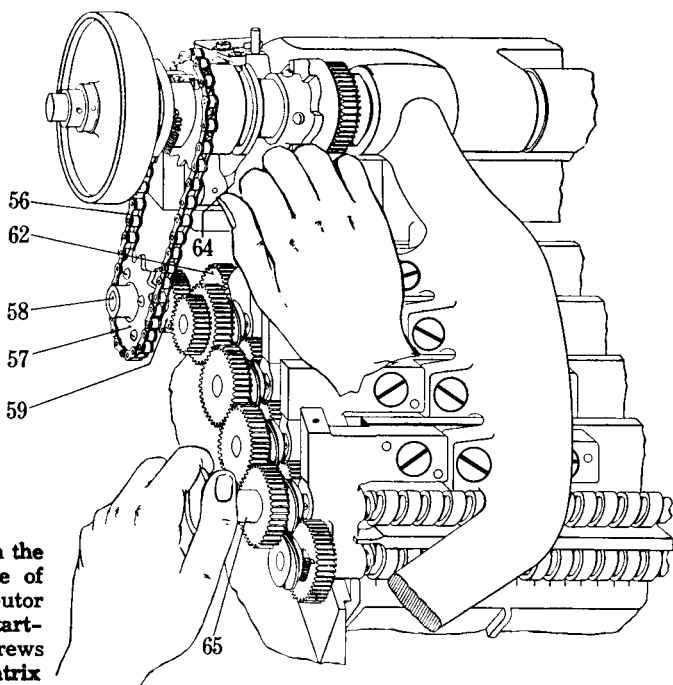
View from the rear of the machine of the Model 9 distributor showing method of starting the distributor screws after a clogged matrix has been removed.
